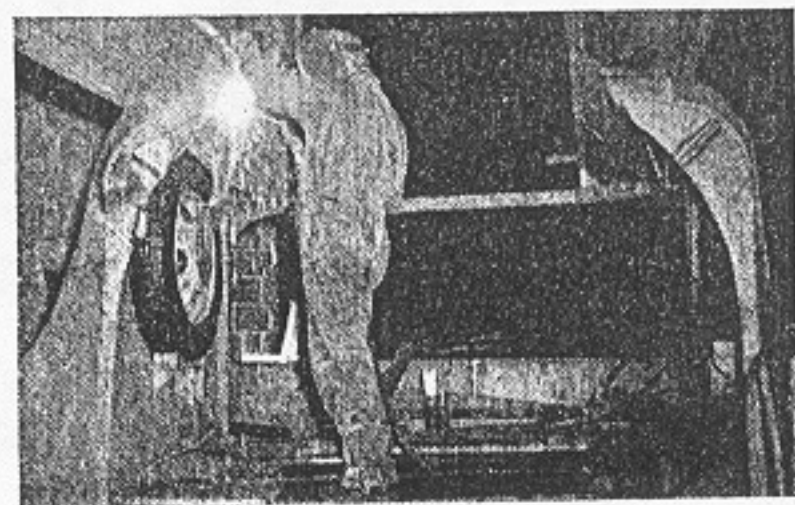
Horizontal welding in extending the framework of transport trailer.
